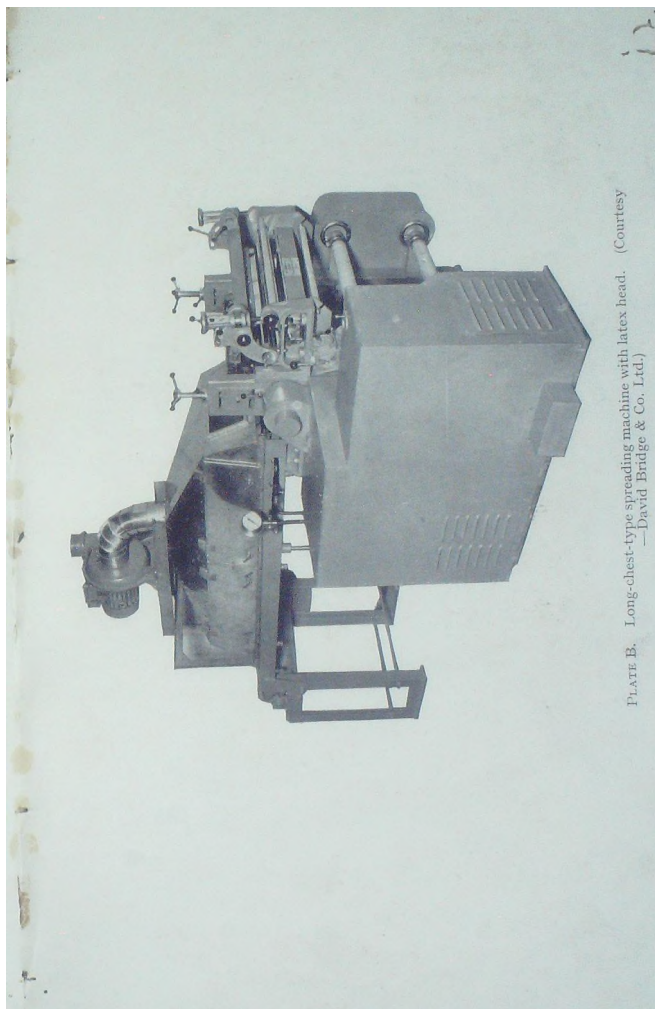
PLATE B. Long-chest-type spreading machine with latex head. (Courtesy
